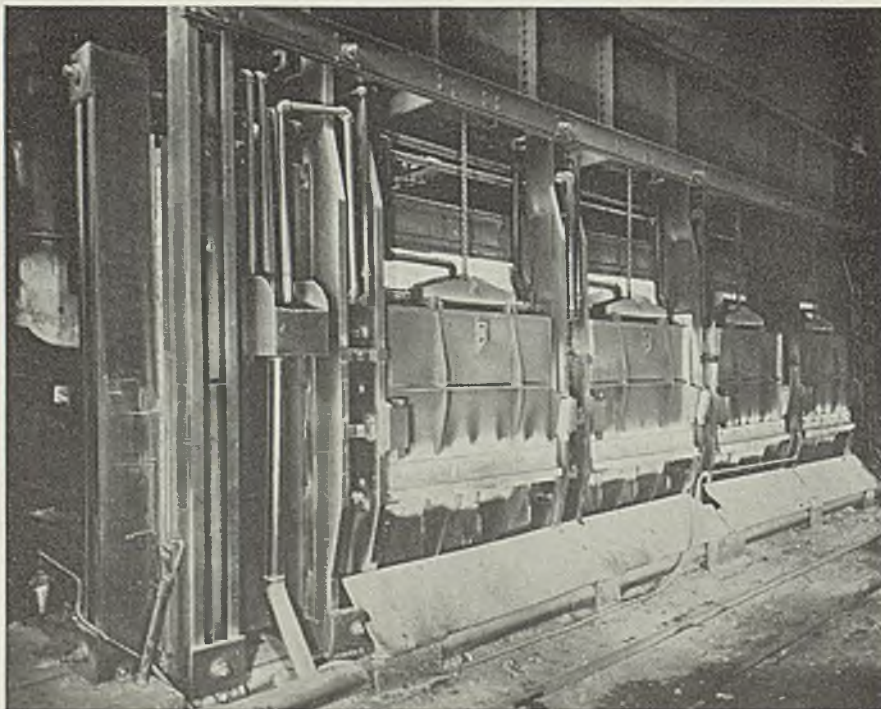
Front view of new, recuperative, side door, ingot heating furnace
